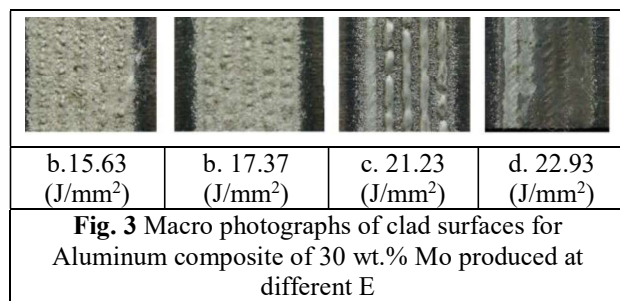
Macro photographs of clad surfaces for Aluminum composite of 30 wt.% Mo produced at different E
